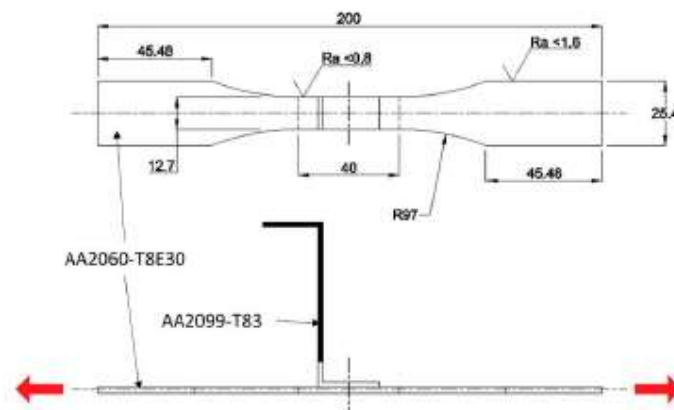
FSW specimens machined from the coupons used for the static tensile and fatigue tests under hoop-stress loading conditions (indicated by the red arrows).
